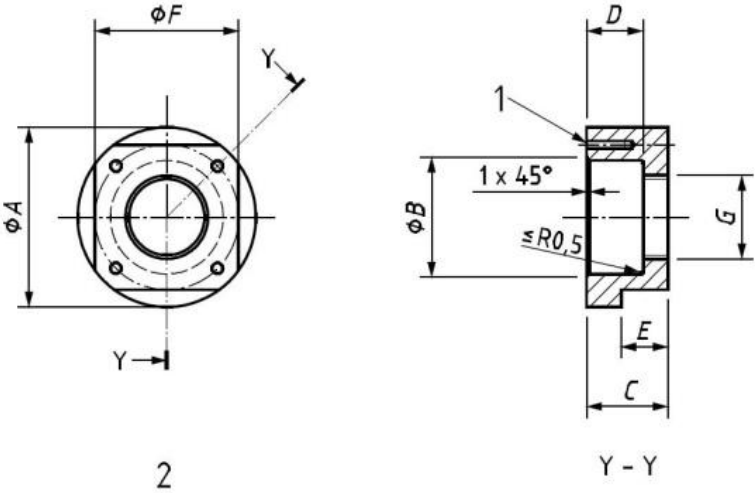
Cover for a threaded type disturbance generator, with dimensions as set out in Table A.1
